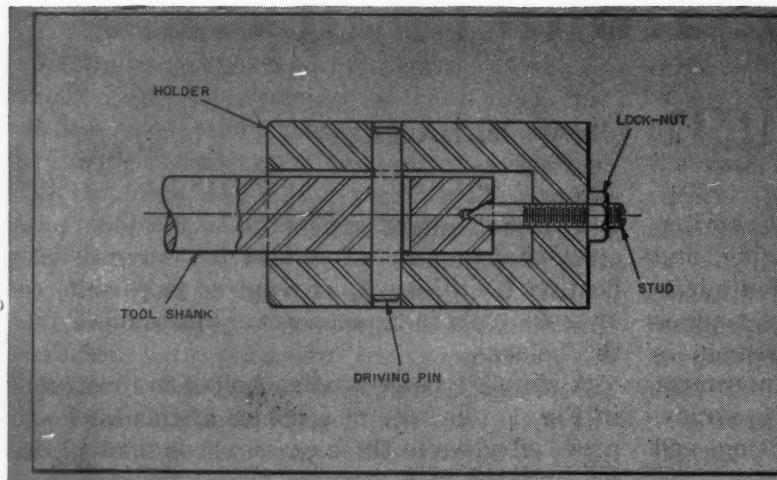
One method of minimizing sag when the floating tool-holder is employed horizontally is to provide a cone-pointed stud for supporting the end of the tool shank
